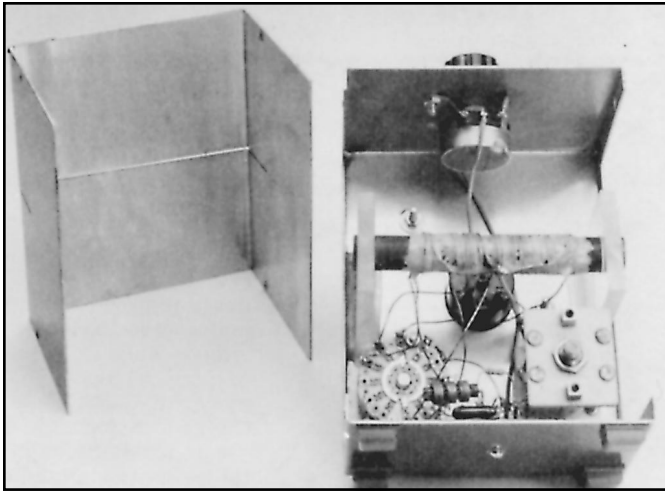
The current probe just before final assembly. Note that all parts except the ferrite rod are mounted on a single half of the 3×4×5-inch Minibox (Bud CU-2105B or equiv.). Rubber grommets are fitted in holes at the ends of the slot to accept the rod during assembly of the enclosure. Leads in the RF section should be kept as short as possible, although those from the rod windings must necessarily be left somewhat long to facilitate final assembly.
